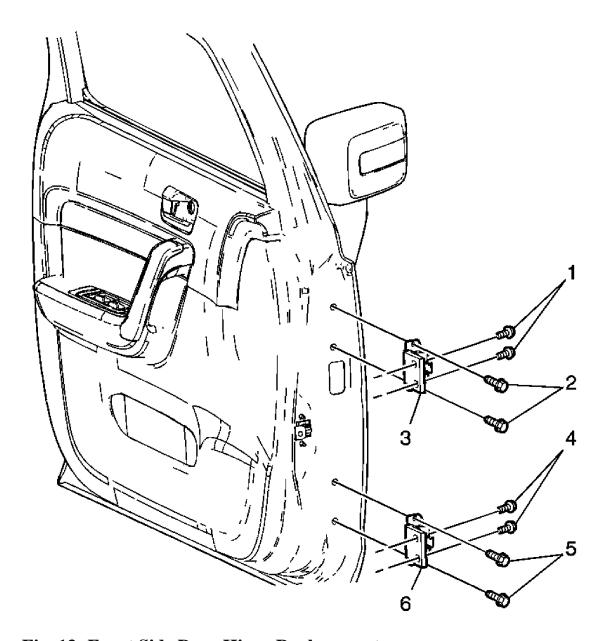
Front Side Door Hinge Replacement Courtesy of GENERAL MOTORS CORP.
